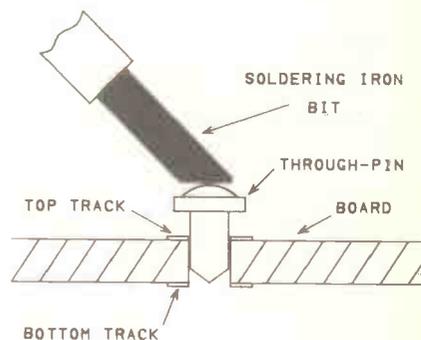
Fitting a through-pin with the aid of a soldering iron.
